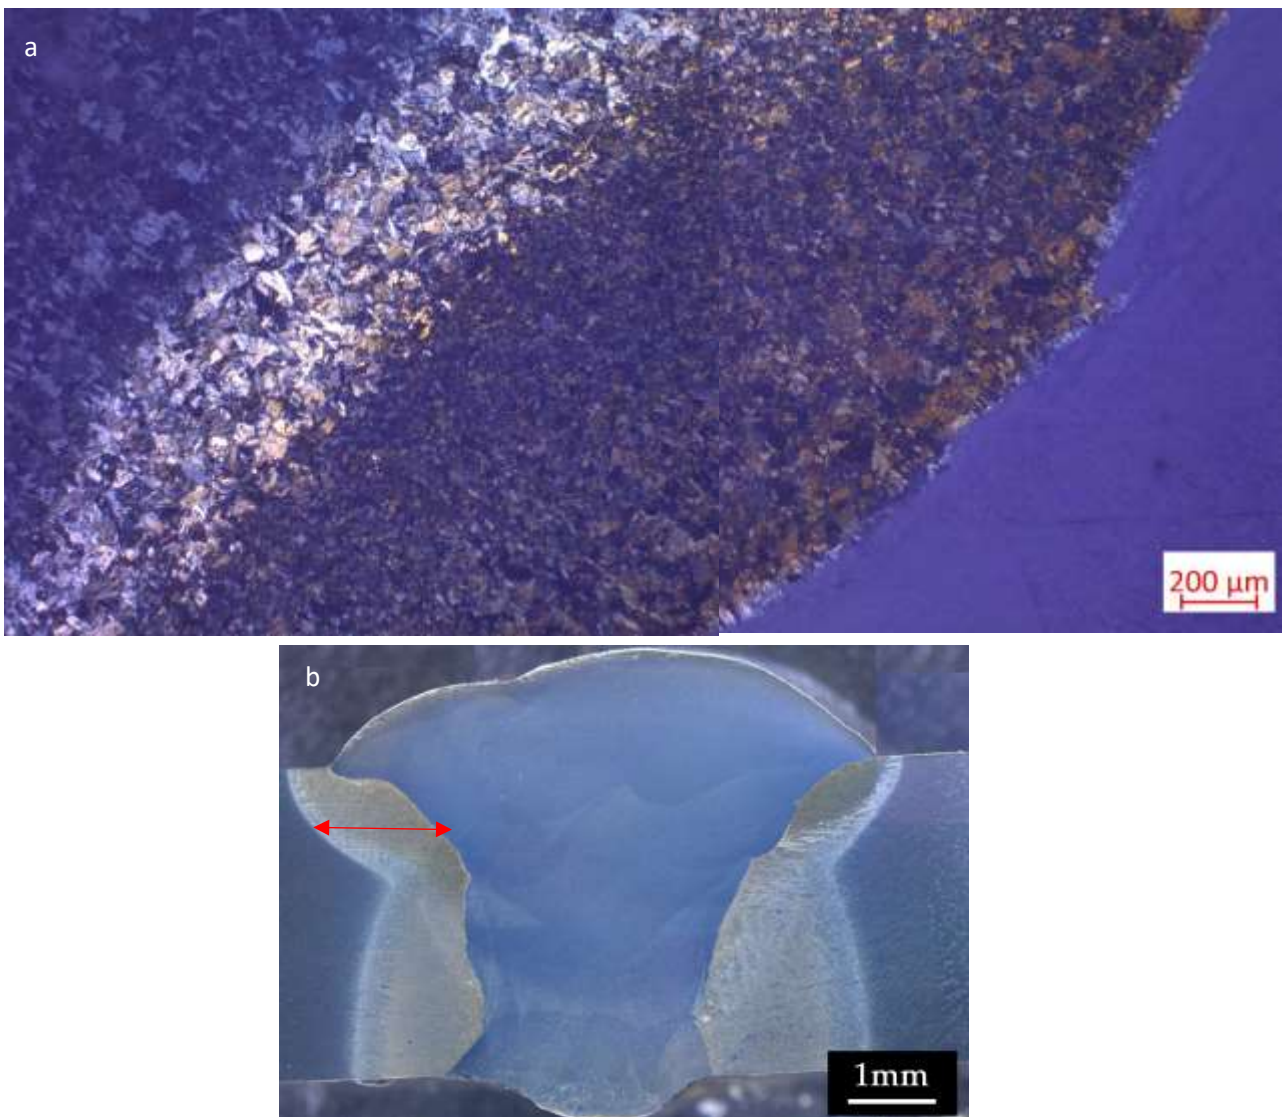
Optical microscope picture of welded sample heat affected zone (a), representation of the weld bead section (b)
